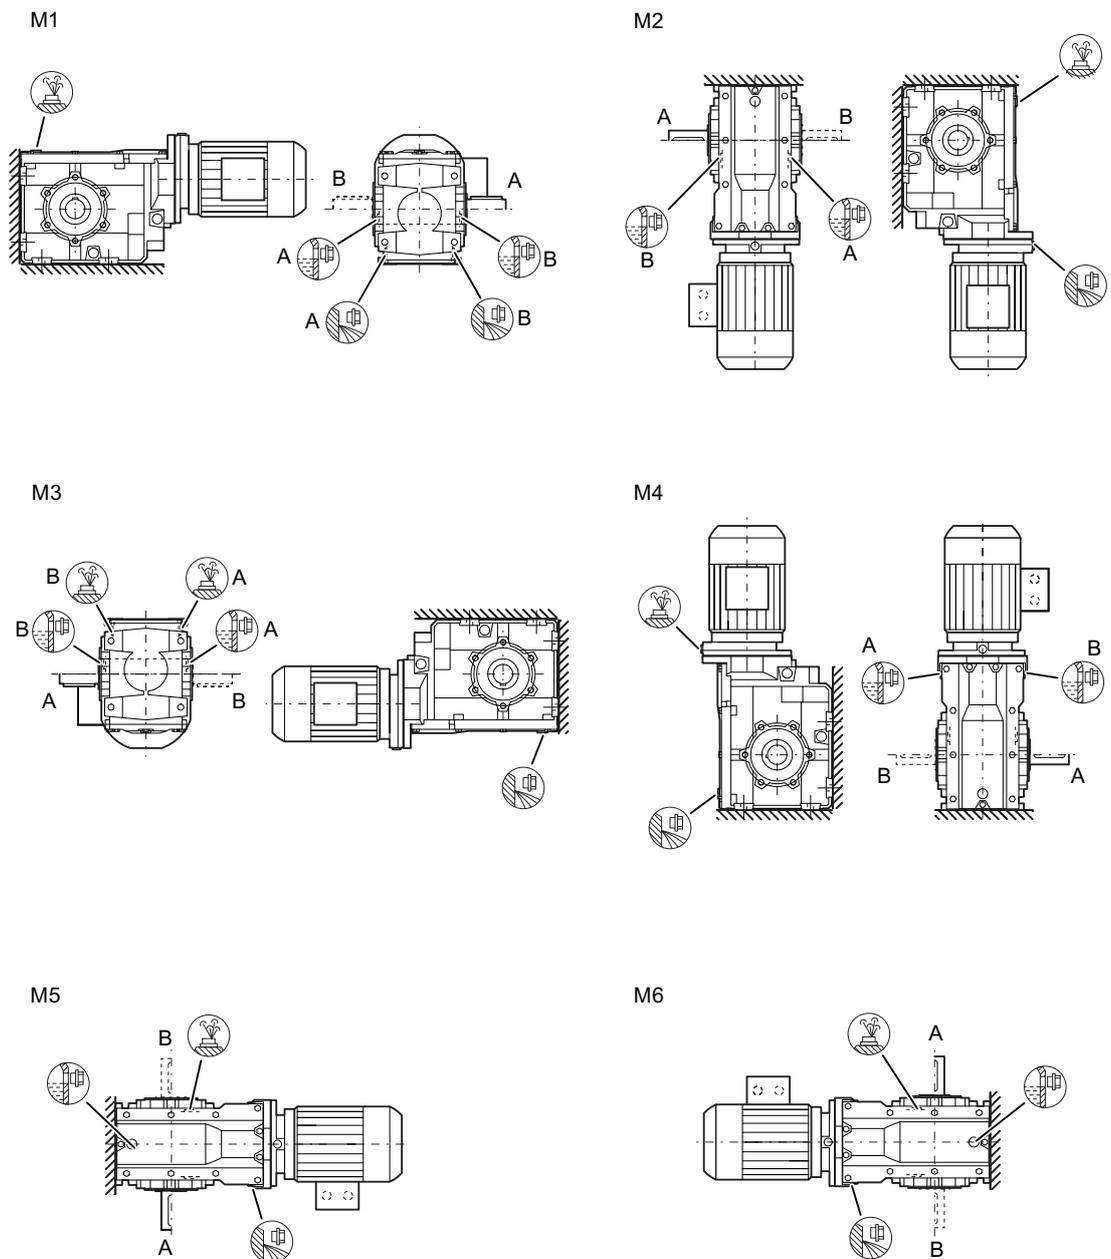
Mounting position for bevel gearbox B foot-mounted design, sizes 39 - 49
